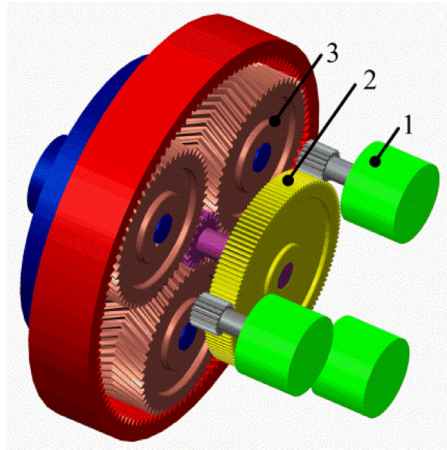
Multi-motor torque coupling system. (1-motor; 2-torque coupling gear set; 3-planetary gear set.)
